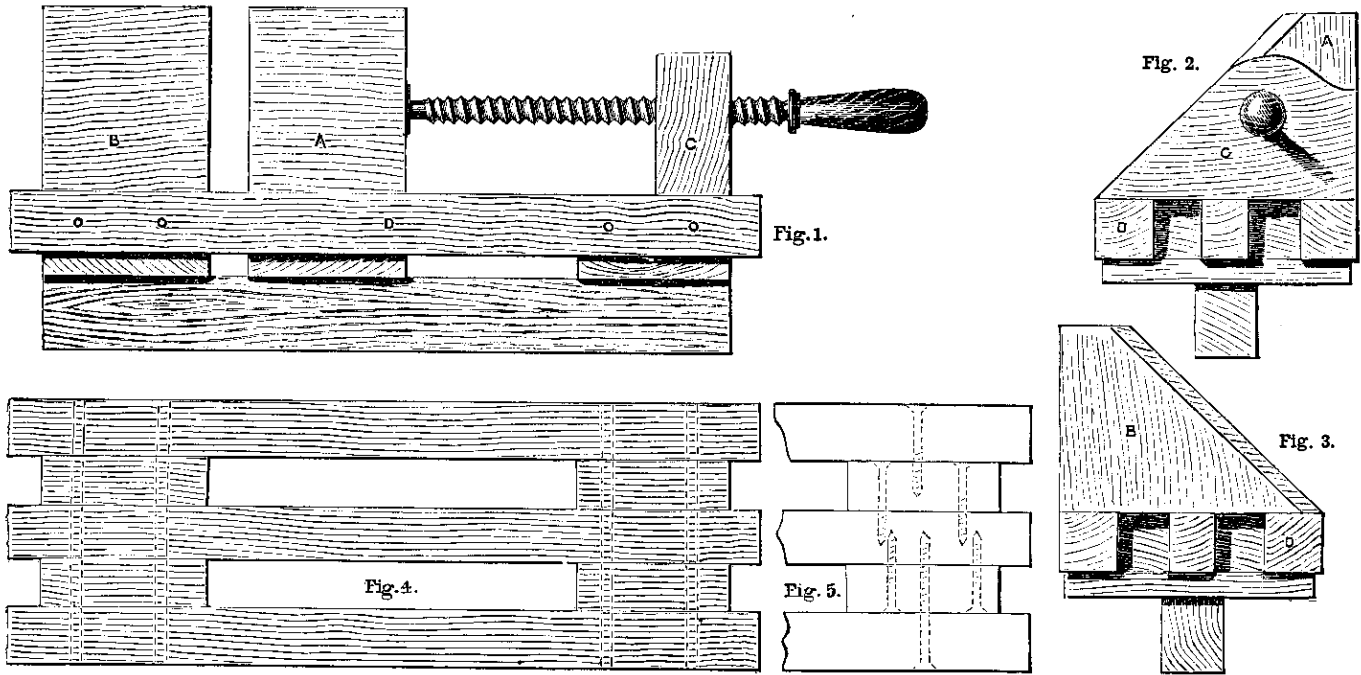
Front Elevation of Mitre Block, showing Hand Screw. Fig. 2.—Elevation of Right-hand End. Fig. 3.—Elevation of Left-hand End. Fig. 4.—Plan of Frame. Fig. 5.—Alternative Mode of Fastening Parts of Frame together by Screw Nails.
